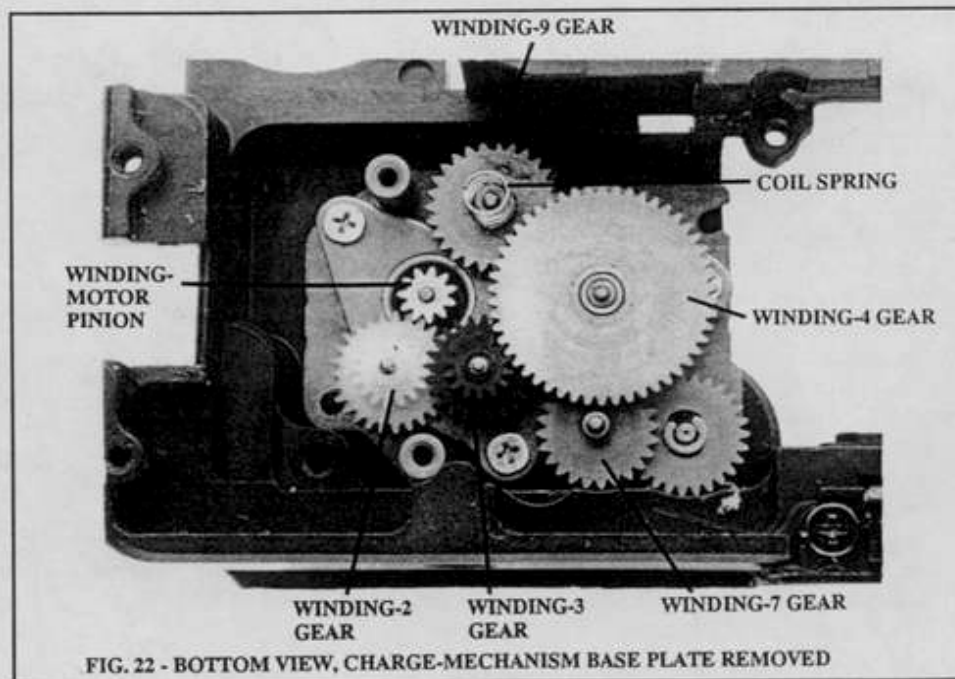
BOTTOM VIEW, CHARGE-MECHANISM BASE PLATE REMOVED
